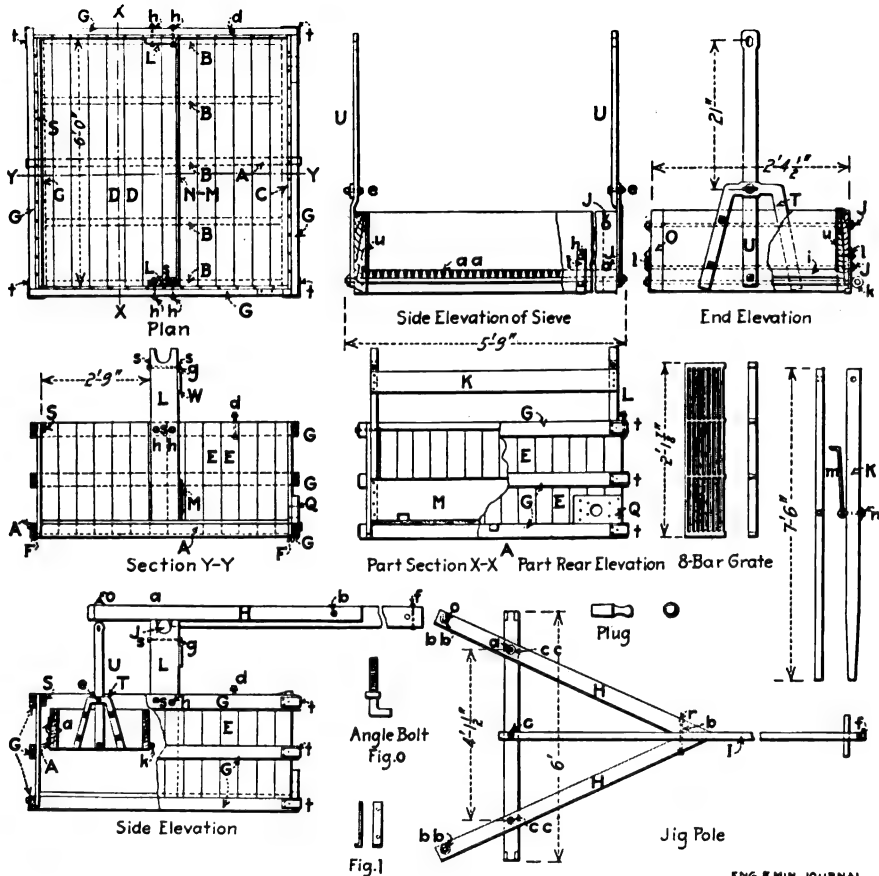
DETAILS OF A TYPICAL JOPLIN HAND JIG.
